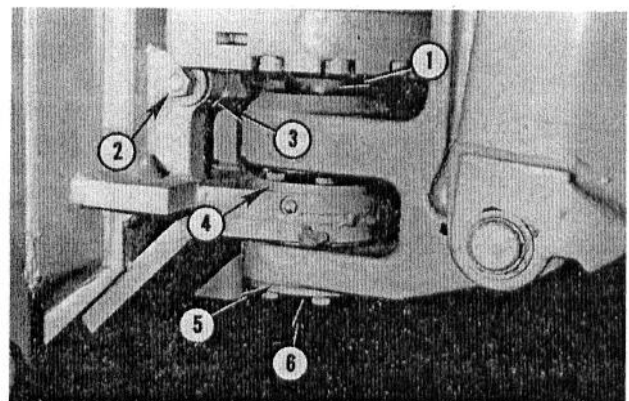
Swing Cylinder Lower Pivot Area Mounting
